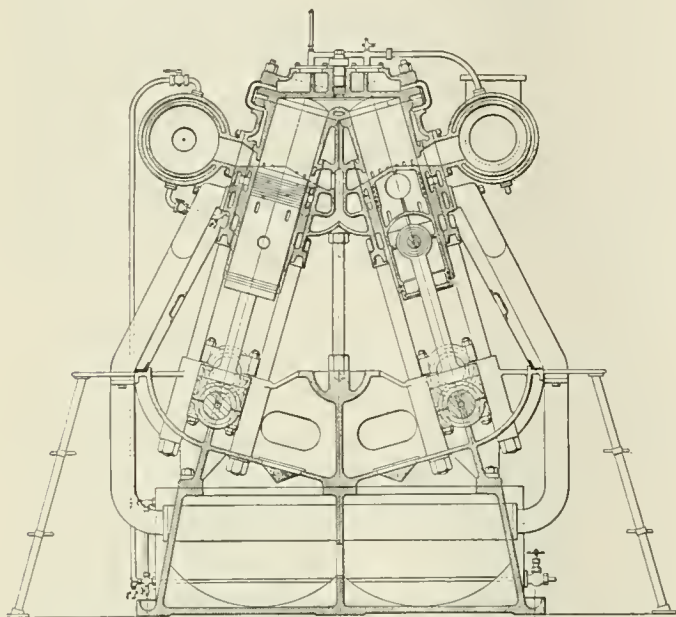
SECTION THROUGH KNUDSEN DIESEL ENGINE
